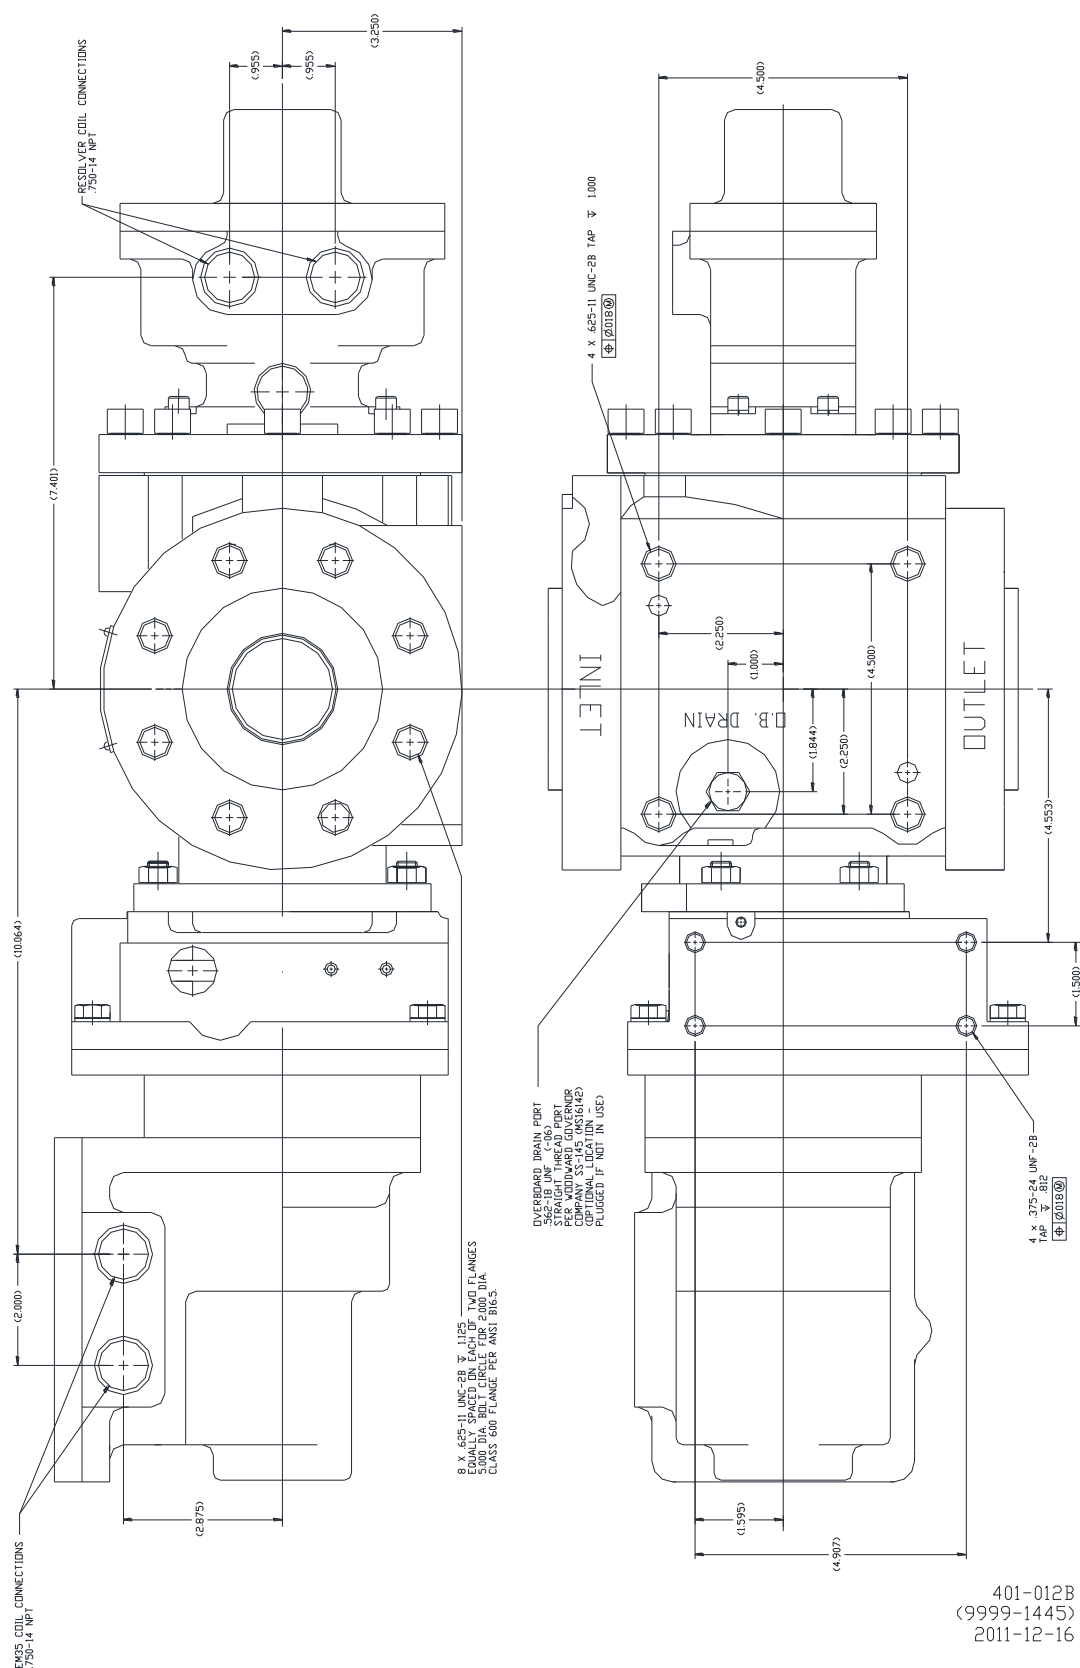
EM35MR Actuator/3103 Gas Valve 900 psig PED/Resolver Outline
